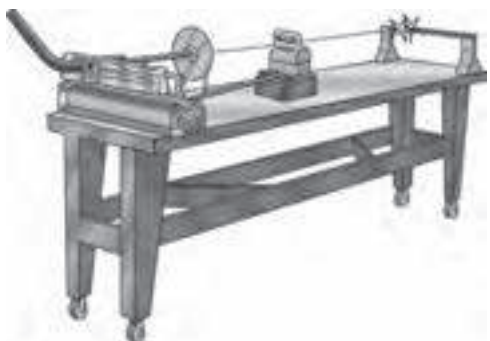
Hydraulic bender with portable table for mandrel bending
